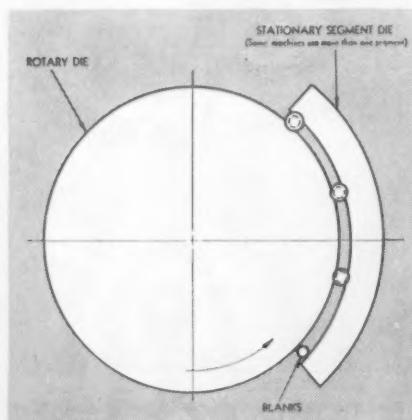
Rotary planetary machines have one central rotary die on fixed axis and stationary concave segment dies located as shown.
